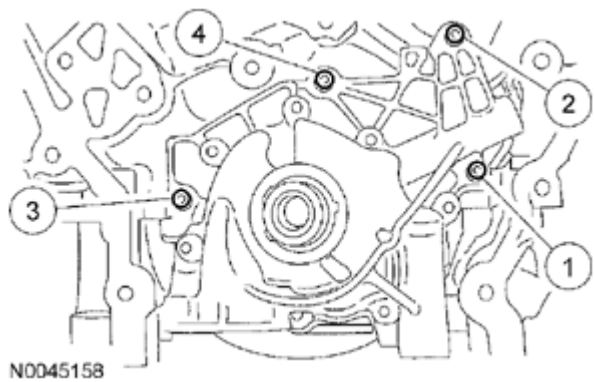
Identifying Oil Pump Bolts Removing Sequence
